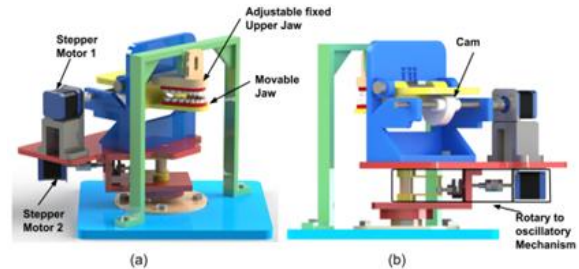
Basic CAD model of Masticatory Robot, showing only the positions of the actuators relative to the mouth (a) Isometric Front View (b) Isometric back View
